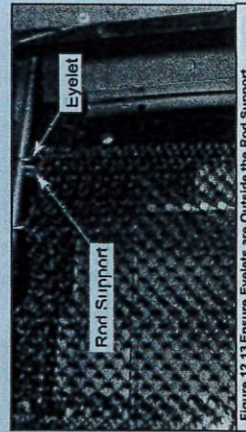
Ensure Eyelets are Outside the Rod Support
